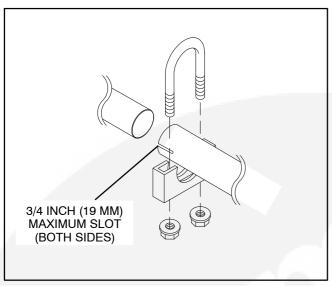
EXHAUST TAILPIPE CONNECTIONS
